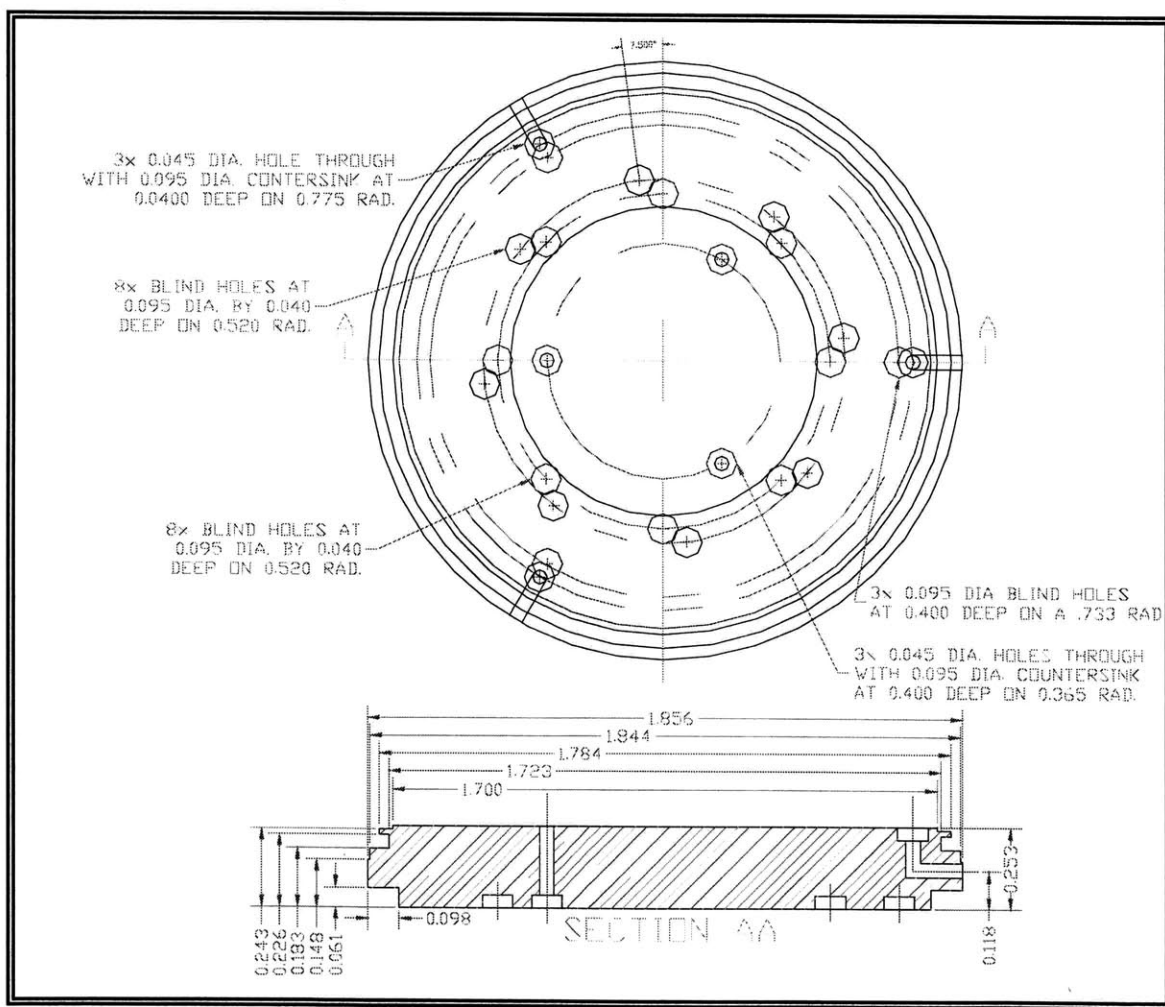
The valve bulkhead, which maintains pressure differentials the cold end, contains two sealing surfaces on opposing sides along its outer perimeter
